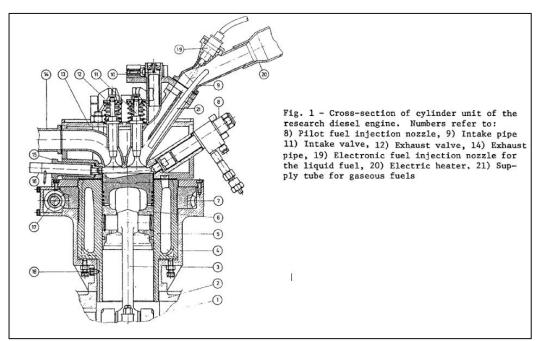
A cross-section of cylinder unit in the test engine. ⁶⁷
